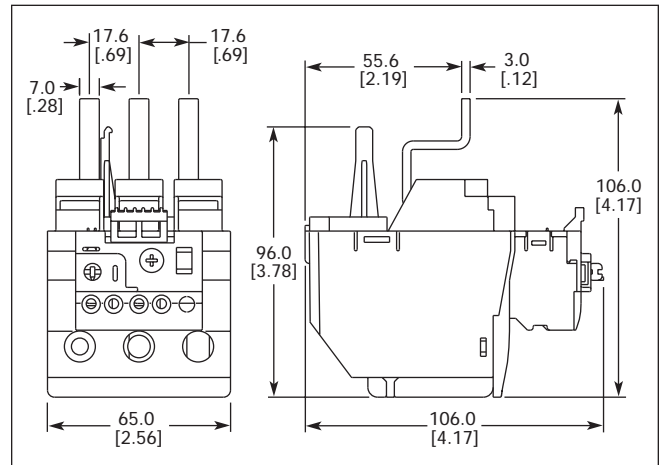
65 mm C396 (15 – 75A) Direct Connect to XT Frame D Contactor — Approximate Dimensions in mm [in]
